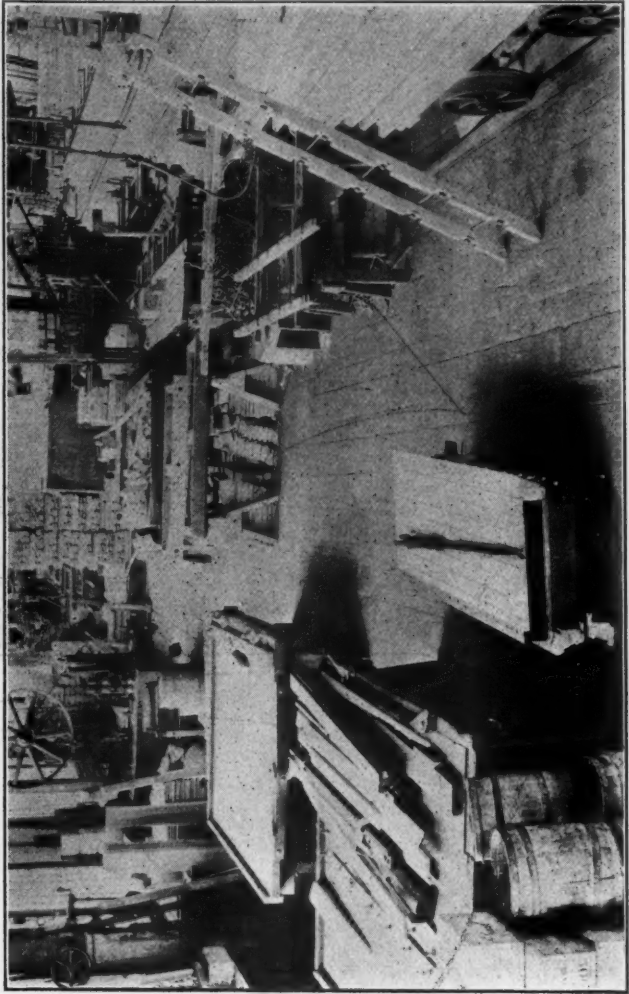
BOX CAR SIDE DOOR AND LADDER DEPARTMENT IN THE PLANING MILL.
